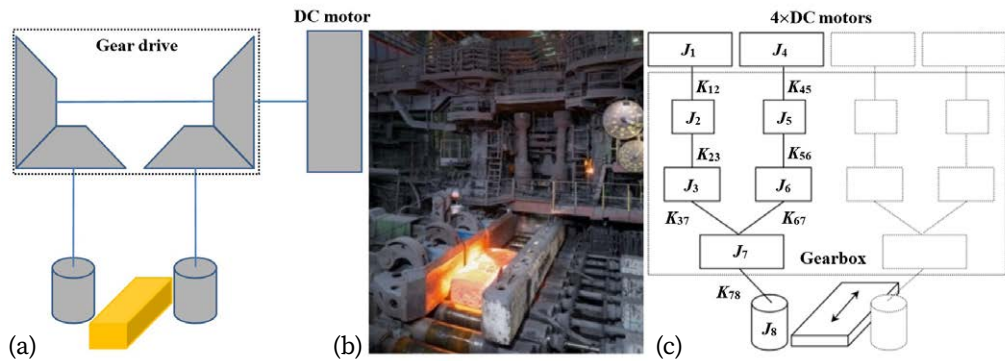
Gear drive of vertical rolls in a slabbing mill:
